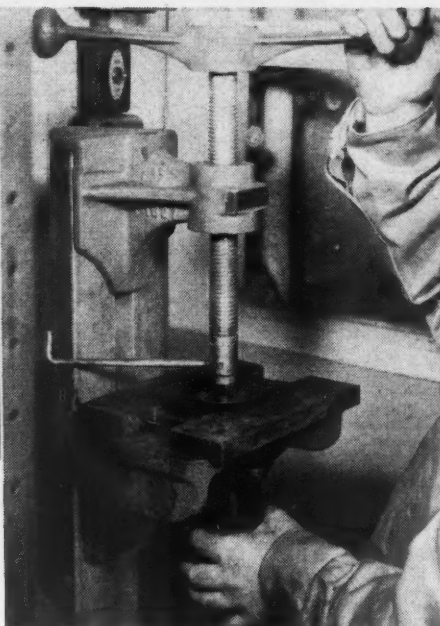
Using an arbor press to remove the drive pulley. Do not drive it off.
